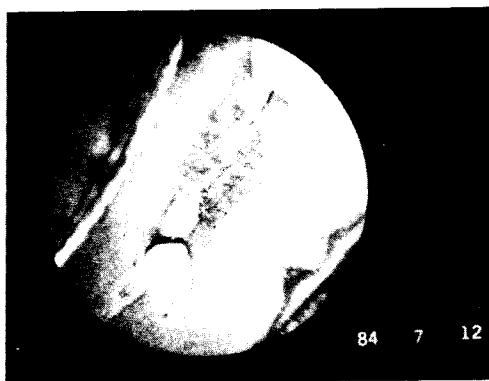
Tyne RM1C - combustion chamber - cracking between cooling holes from inside the "can"
